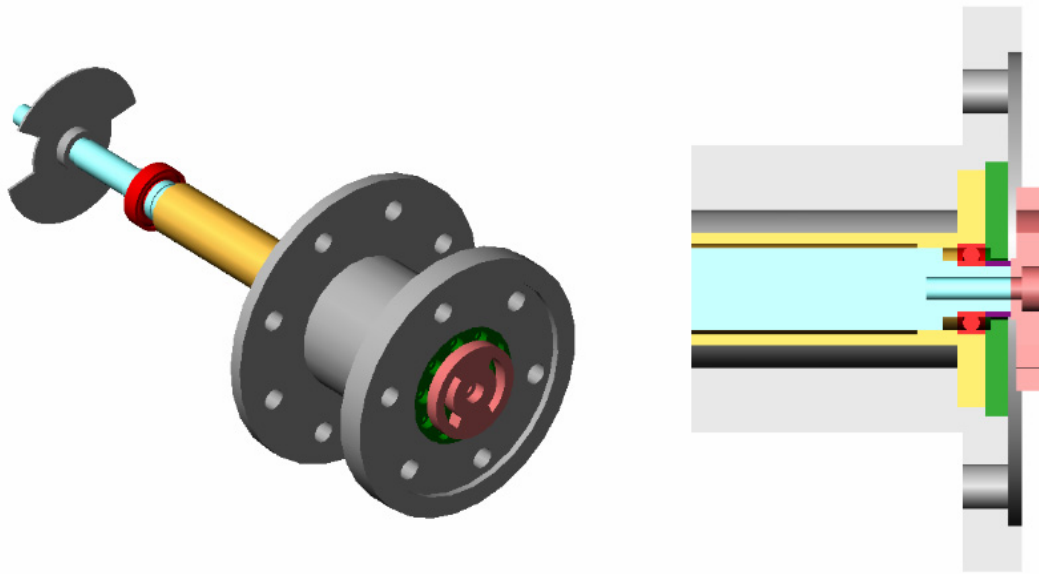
Left: Image showing the Siren assembly with shaft and sensor wheel. Right: Section view of the siren showing stator, bearing plate, bearing and rotor arrangement.
